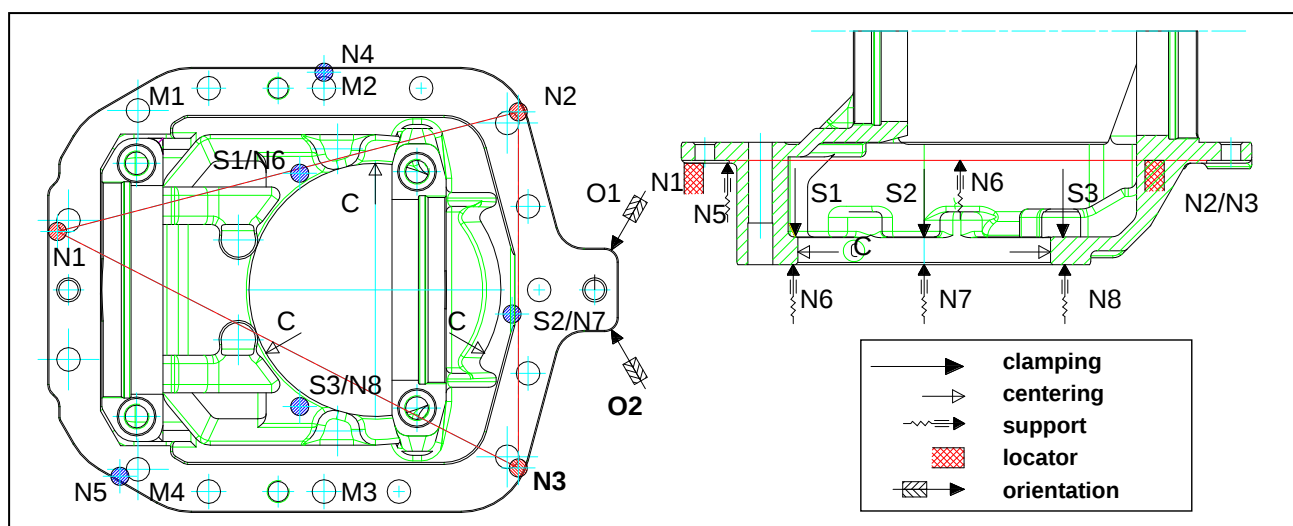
Arrangement of backrests, supports and clamping points on the workpiece
